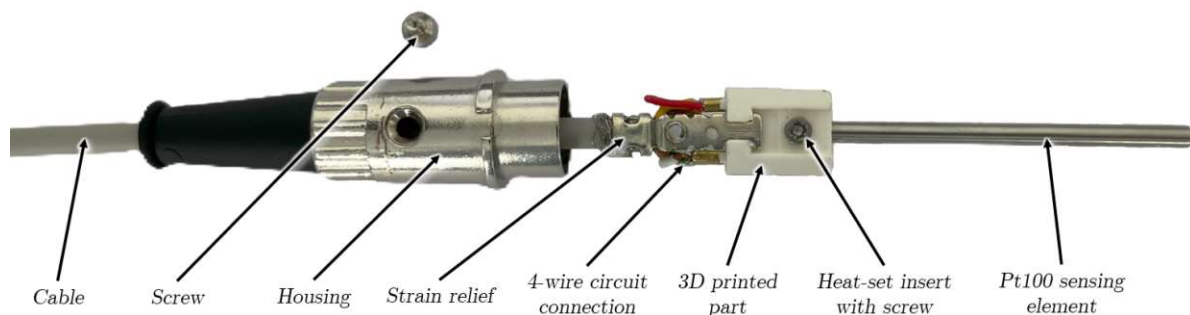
Disassembled new sensor with a Pt100 sensing element of constant diameter. For assembly, the entire package is inserted into the housing and then secured with the screw.
